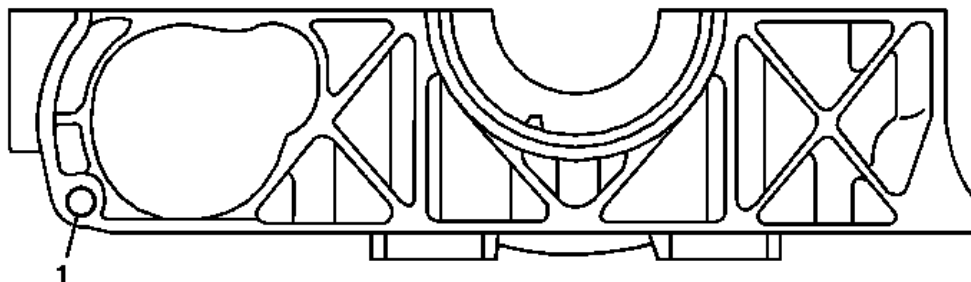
Identifying Bolt Size & Locations On Lower Crankcase - Back
